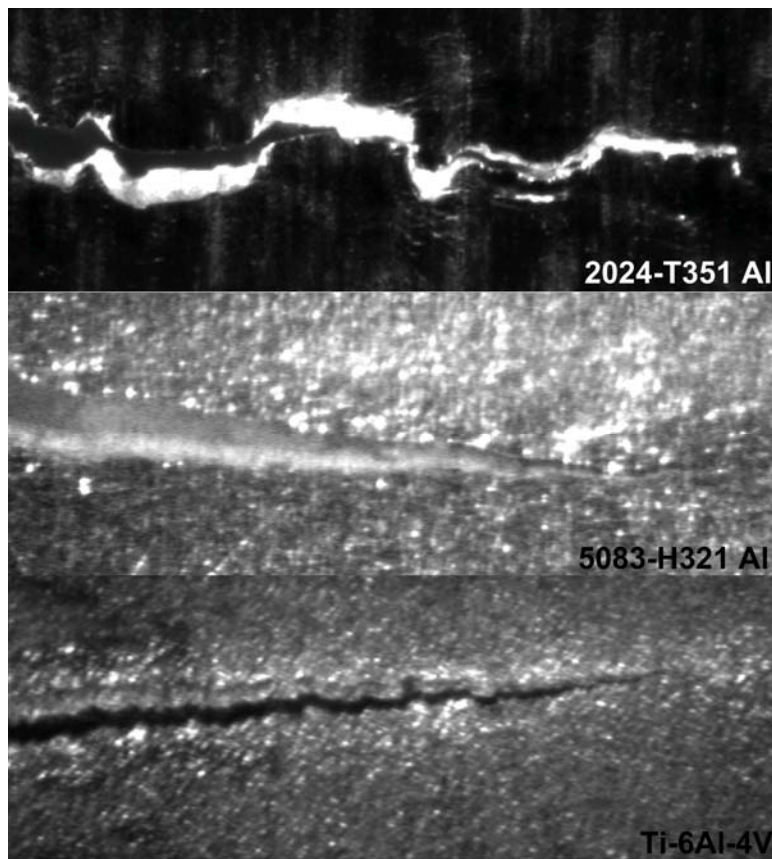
Flank shapes, due to fracture type, for the three materials in this study
